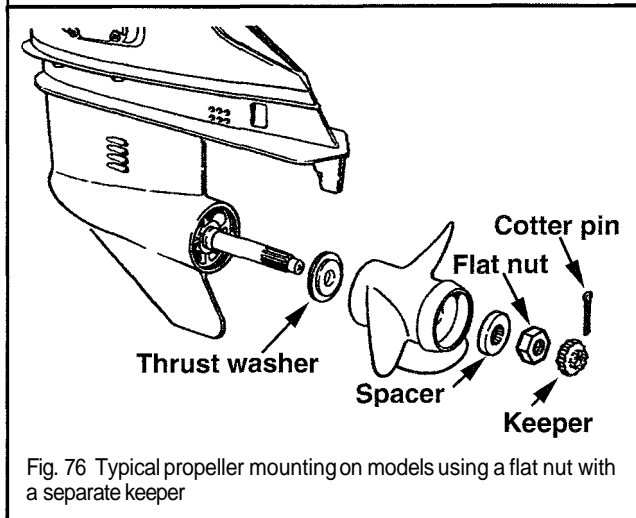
Typical propeller mounting on models using a flat nut with a separate keeper
